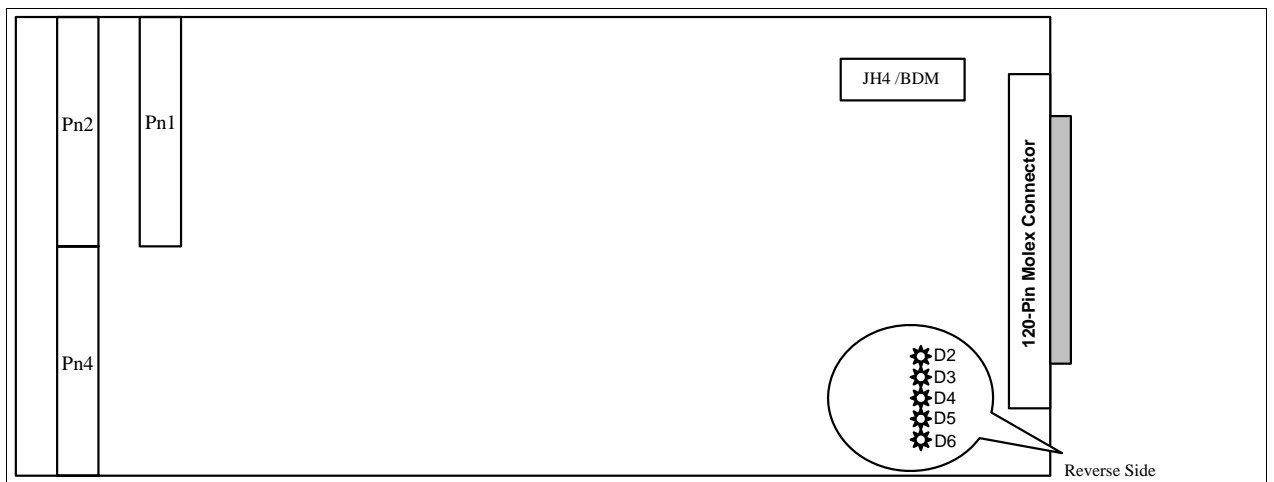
HSS Frontpanel Pin and Indicator Positions
